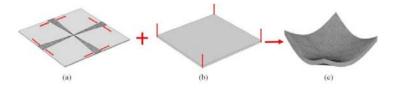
(a) In-plane shrinkage; (b) Out-of-plane bending; (c) 3D formed shape
